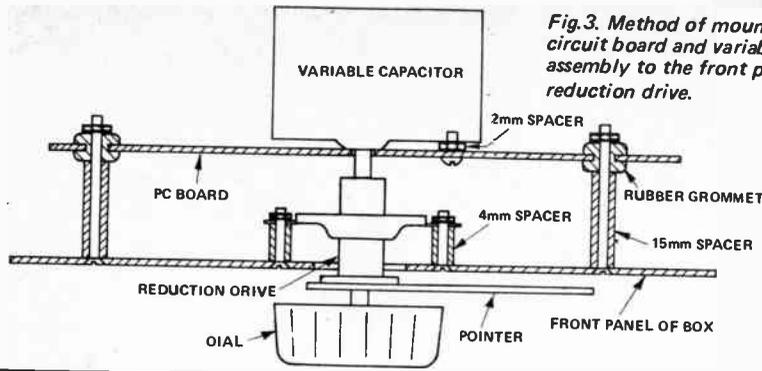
Method of mounting printed-circuit board and variable capacitor assembly to the front panel and reduction drive.
